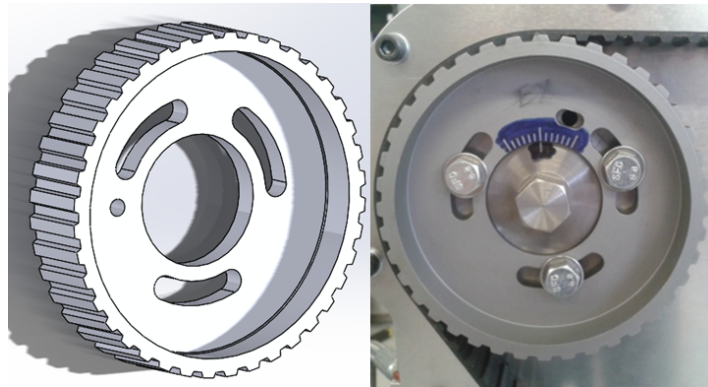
Adjustable camshaft pulley 3D design and prototype.
